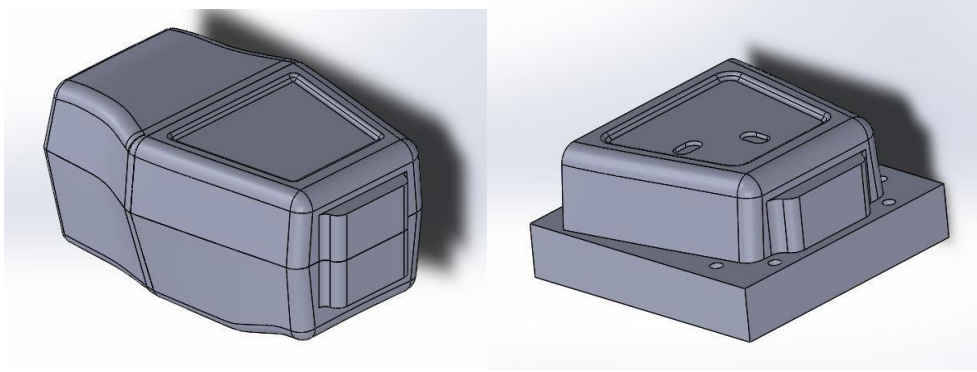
The geometry of the intended “baby chassis” on the left, and the sliced “baby mold” plug with bottom flange on the right.
